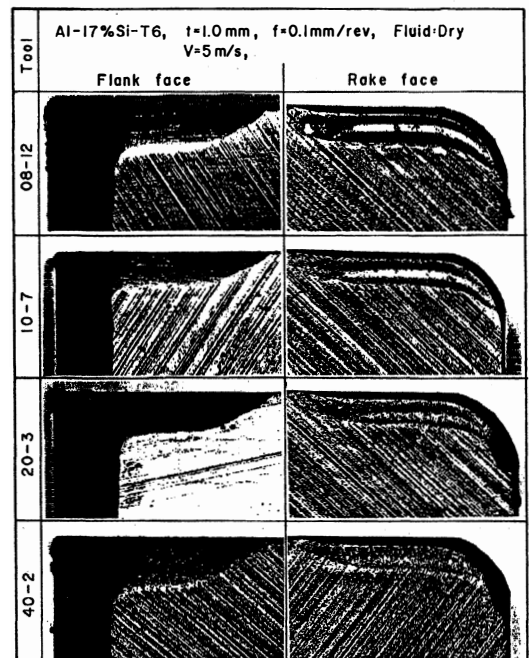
Aspects of flank and rake wear in machining Al-17%Si-T6 alloy. (cutting speed: $V=5\text{m/s}$, fluid: dry)
